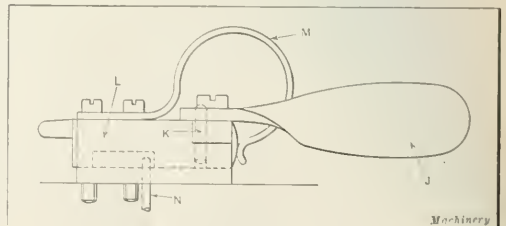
Detail View of Mechanism for locating Work on Fixture
